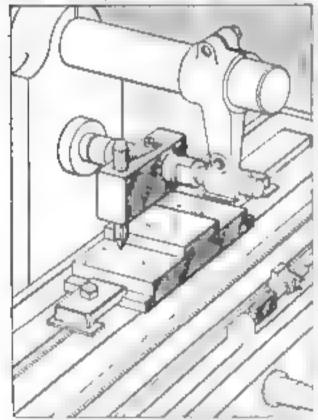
Spotting at techment on milling mechine for laying out work quickly and with remonable accuracy.
